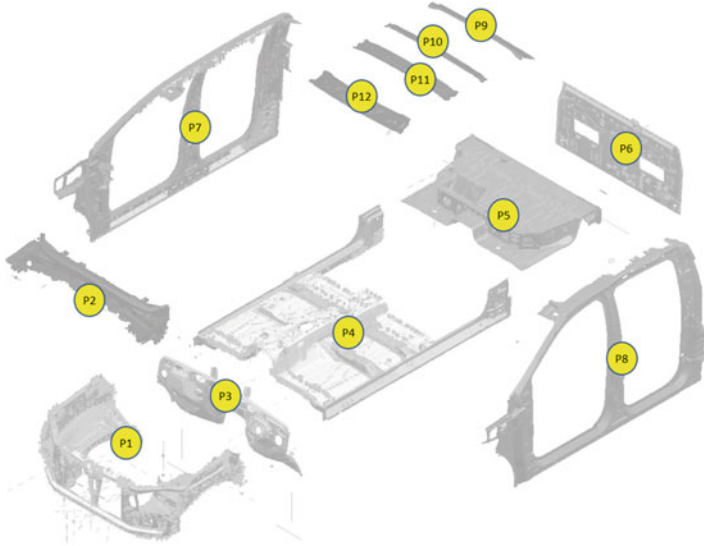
The studied Bodyshell consisting of 12 assemblies
